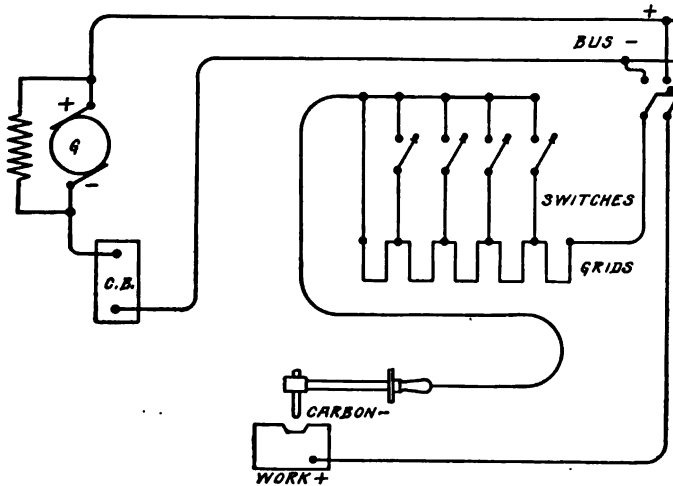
Wiring Diagram for Westinghouse Arc Welder
